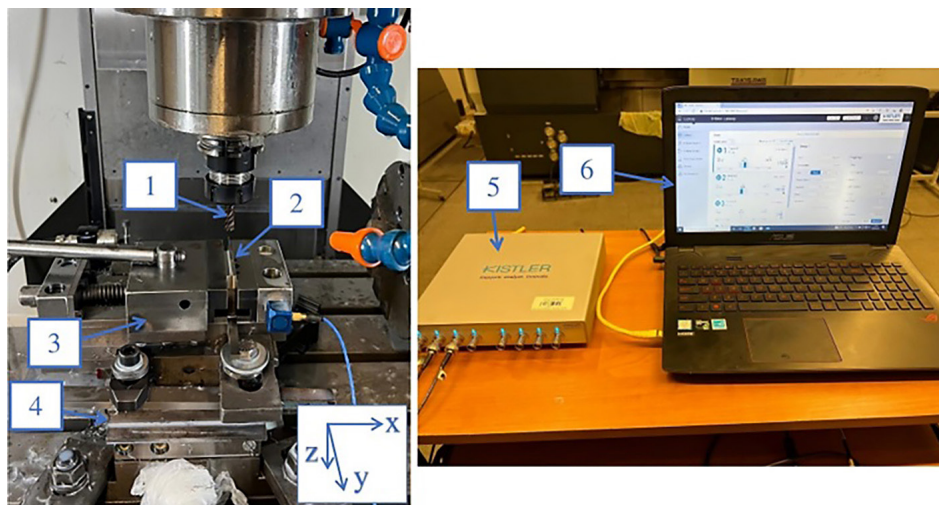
Experimental setup: 1 – tool; 2 – sample; 3 – vise; 4 – Kistler 9265B piezoelectric actuator; 5 – Kistler LabAmp Type 5165A load amplifier; 6 – computer with dedicated Kistler LabAmp software
